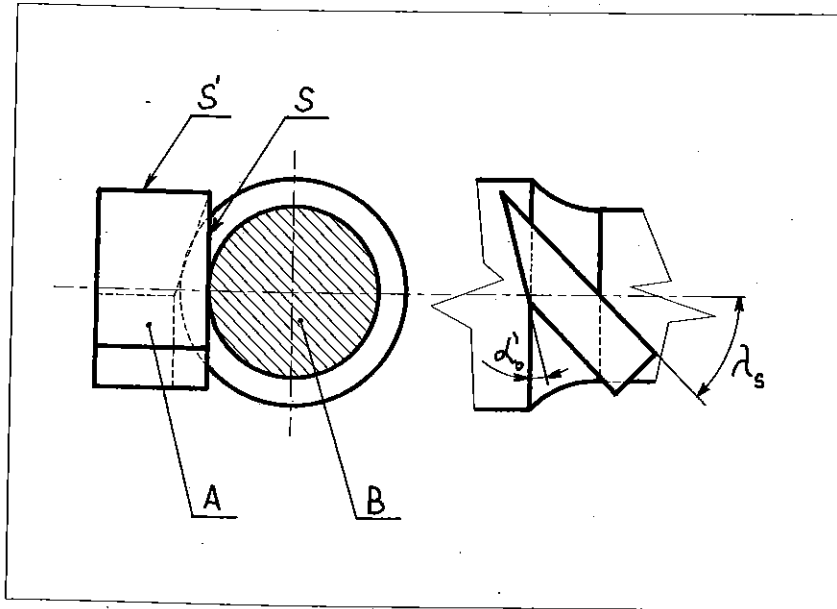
The working cutting tool with linear cutting edge not parallel with the axis of the workpiece. Designation: A - cutting tip working by linear cutting edge, B - machined workpiece
